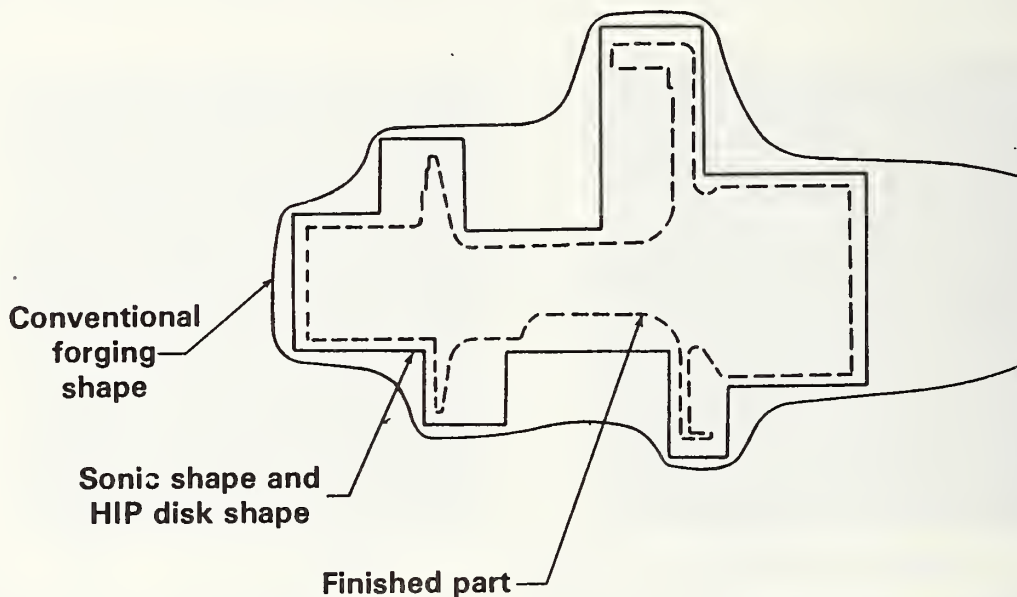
Cross Section of Typical Turbine Disk Forging Outline, with Near Net Sonic Shape and Finished Part Outlines
